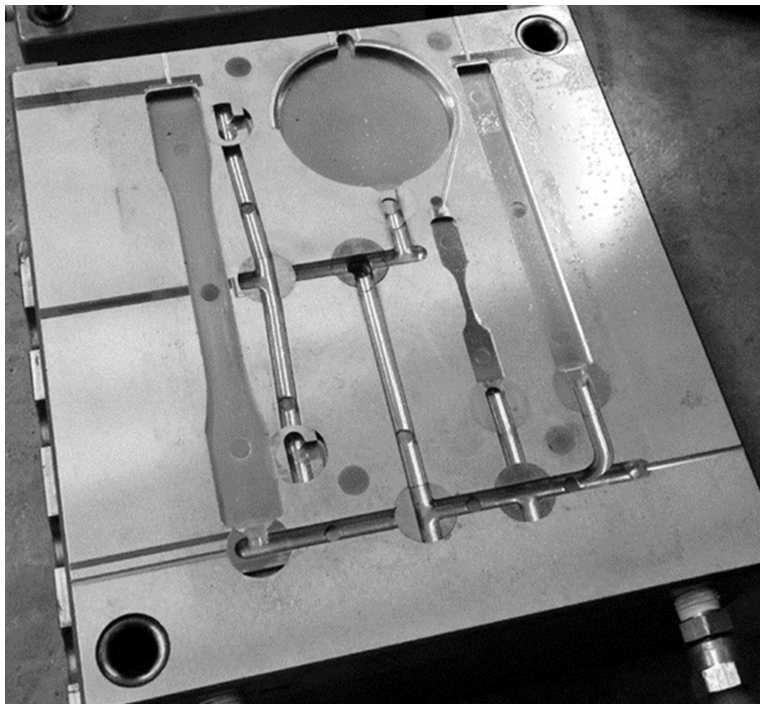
4-cavity mold showing (left to right) ASTM type I Tensile, 2.5" disk, ASTM type V Tensile (not used) and ASTM D790 Flex Bar
